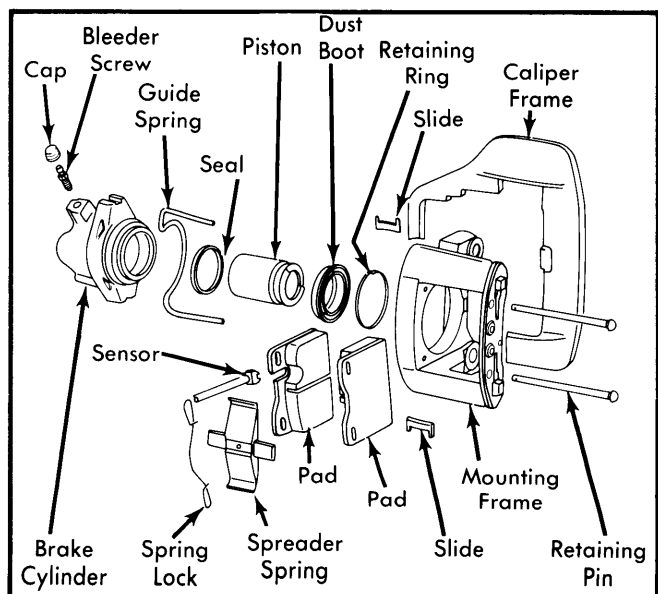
Exploded View of 924 and 928 Brake Caliper Assembly
